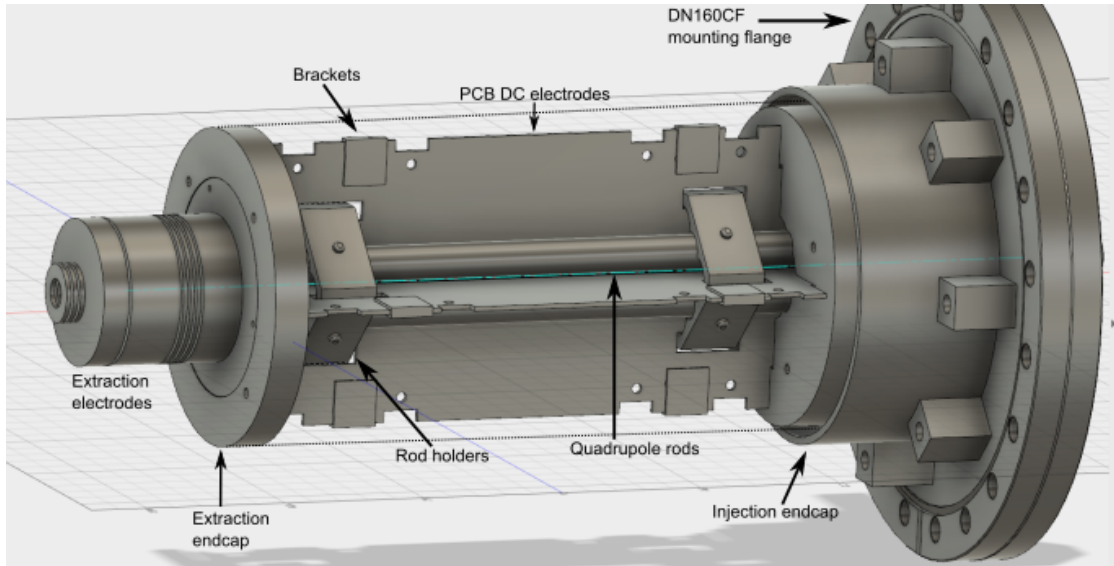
CAD drawing of the initial trap prototype. The injection endcap is a 3D printed piece onto which the quadrupole rods for RF and the PCBs for DC are mounted. The ion beam would enter through the bored mounting flange and exit through the extraction electrodes. The cylindrical region between the extraction and injection endcaps (dashed lines) is enclosed by a steel tube (not shown) to maintain buffer-gas pressure up to 0.1 mbar in the central trap region.
